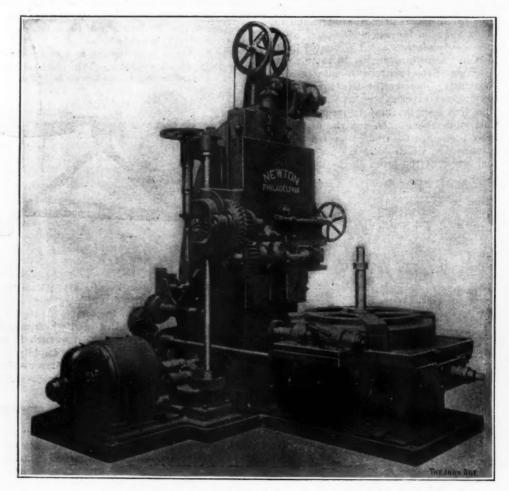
A Heavy 40-In. Automatic Spur Gear Cutting Machine Built by the Newton Machine Tool Works, Philadelphia.
